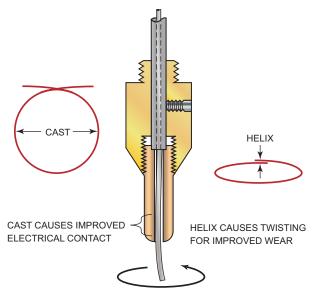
The cast of the welding wire causes it to rub firmly inside of the contact tube for good electrical contact. The helix causes the electrode to twist inside of the contact tube so that the tube is worn uniformly.
